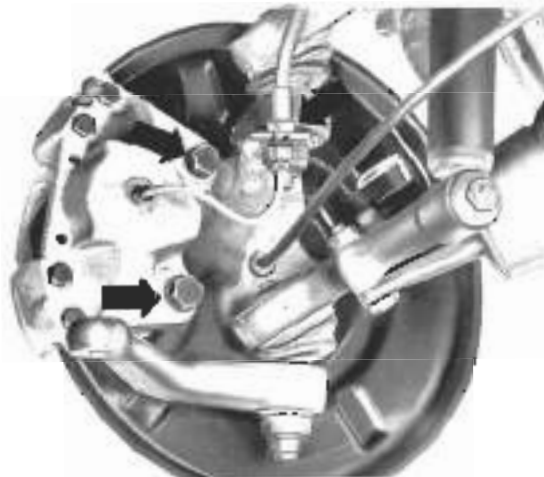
Bolts and hose clamp that hold disc brake caliper on steering knuckle.
